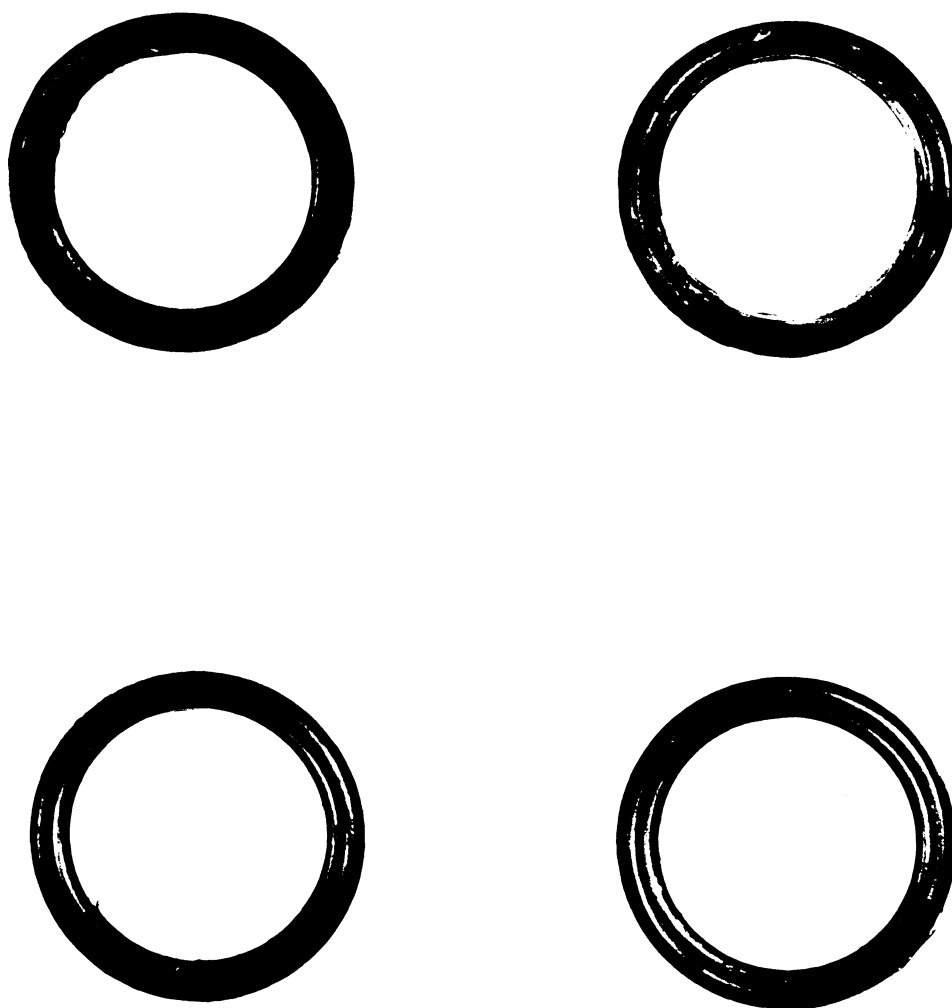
Base detail - test jig confining O-ring, master junction box.
